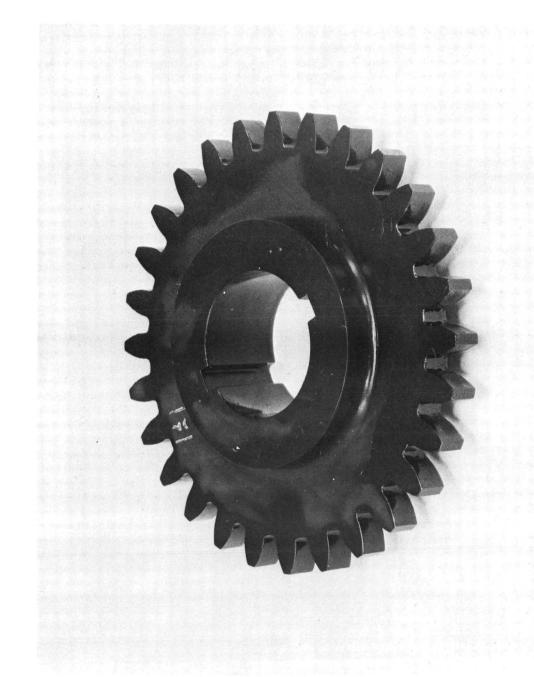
Production Batch of Semi-Finish Machined Standard Forged Gears
